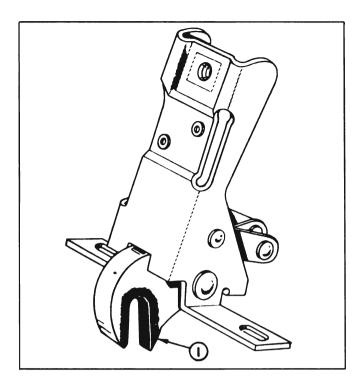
Lubrication of Rear Door Hinge and Hold-Open Assembly—Series 50-70-700
